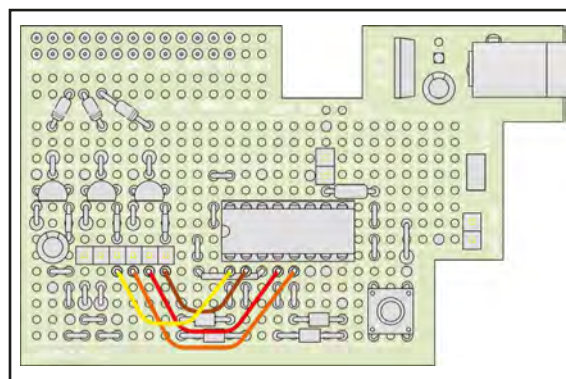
Humble Pi prototype board layout showing flying ribbon cable link to SK2
